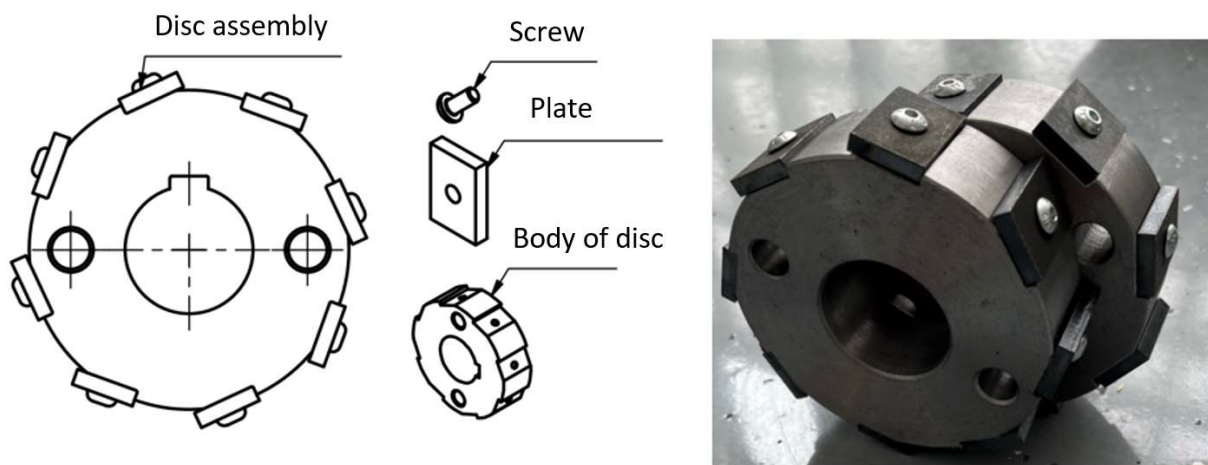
Scraper disc assembly drawing and fabricated prototype
